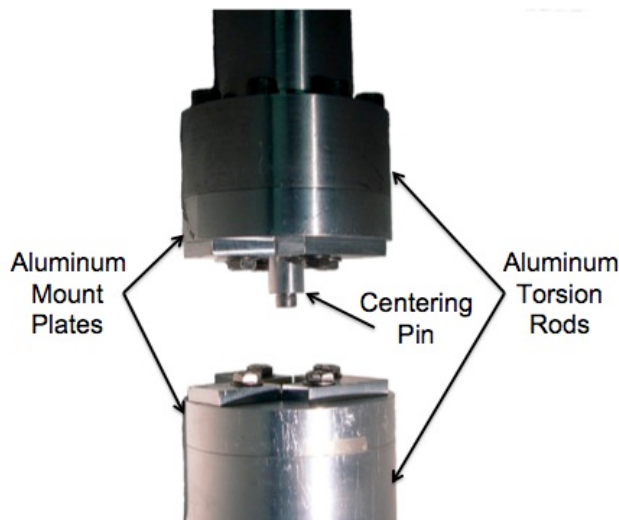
Axial-torsion fixture showing the upper and lower aluminum torsion rods, the upper and lower aluminum mounts plates and the sample-centering pin.
